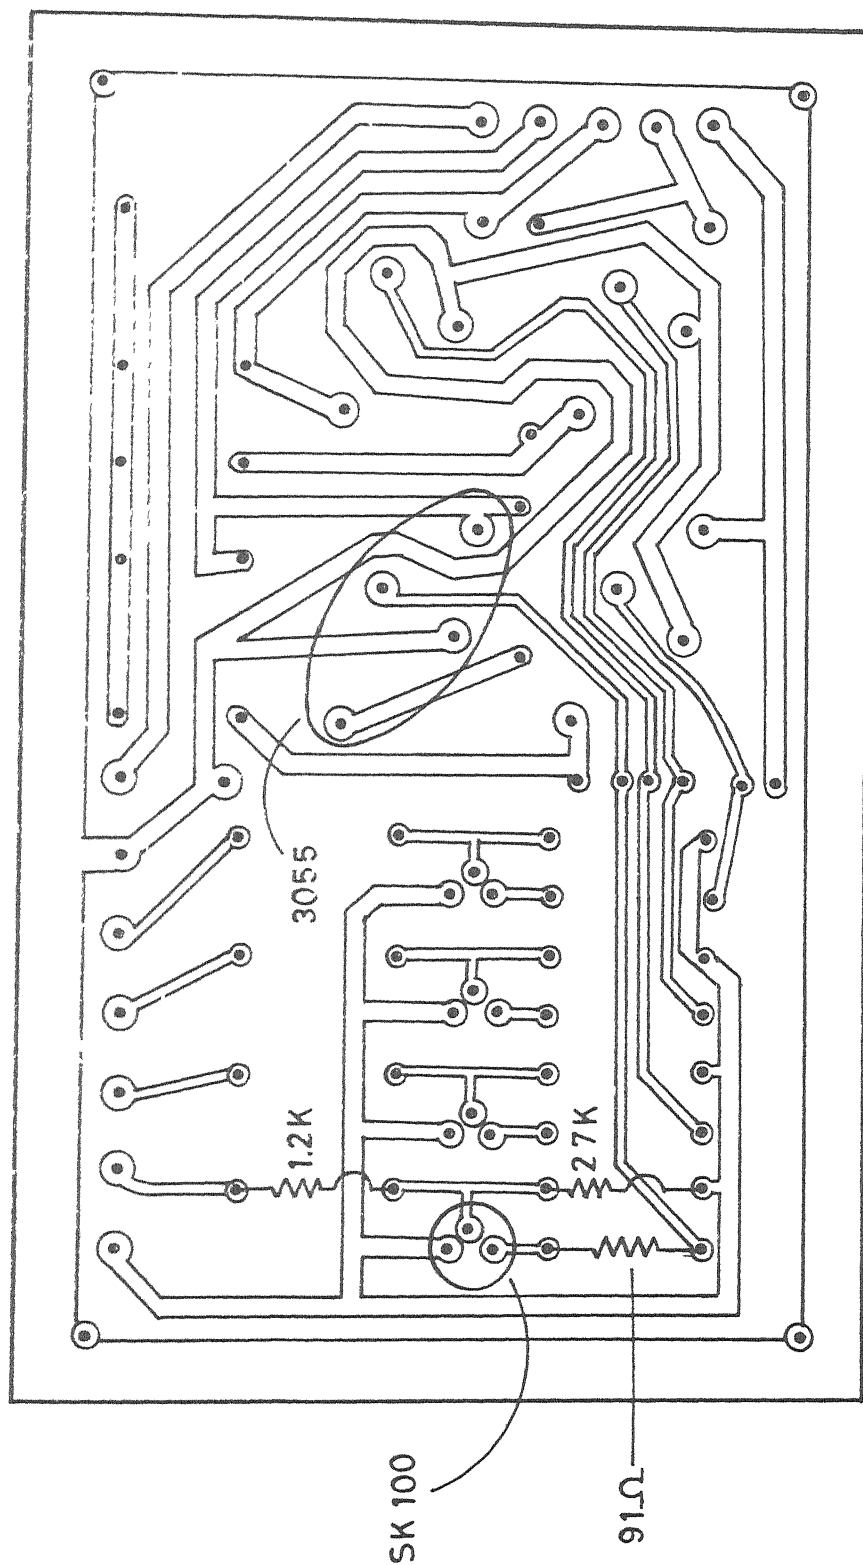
PCB LAYOUT FOR DRIVE CIRCUIT
